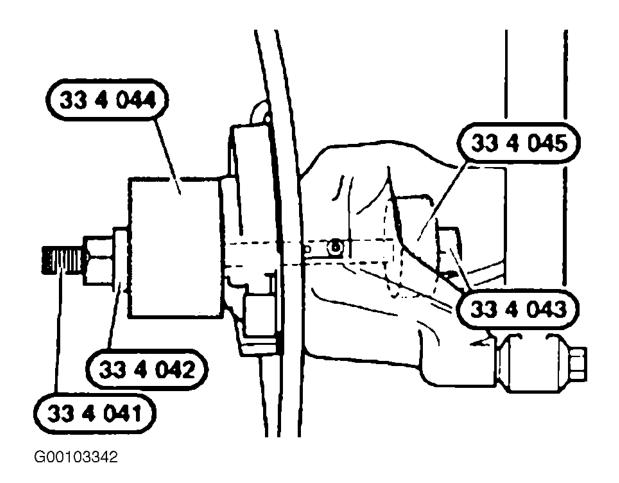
Removing Wheel Bearing (318ti, Z3 Except 2.8) Courtesy of BMW OF NORTH AMERICA, INC.
